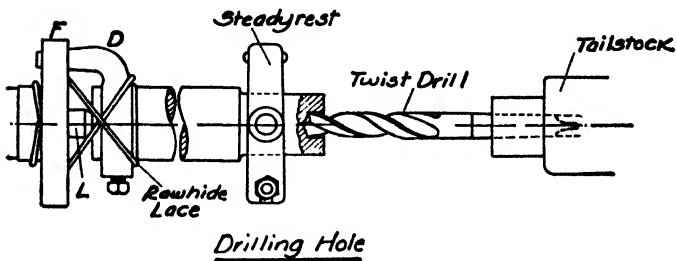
Machining a Shaft with a Tapered Hole in One End
